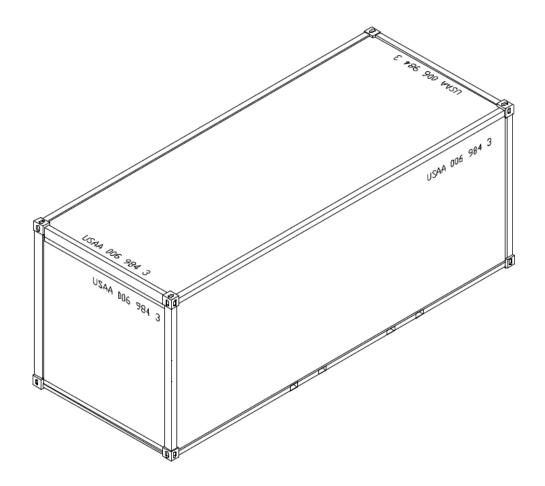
B -TYPICAL HORIZONTAL LAYOUT OF ISO IDENTIFICATION MARKINGS
